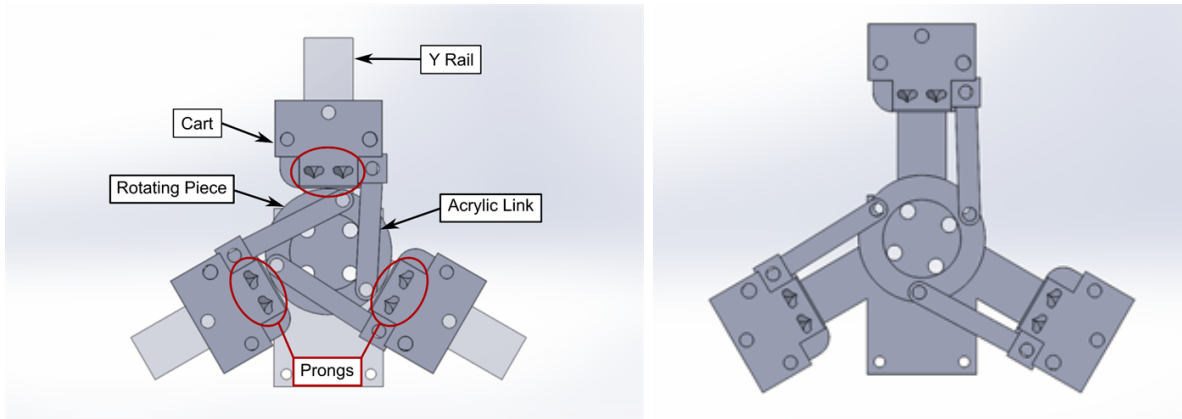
(a) Original Gripper (Closed Position) Bottom View; (b) Original Gripper (Open Position)
